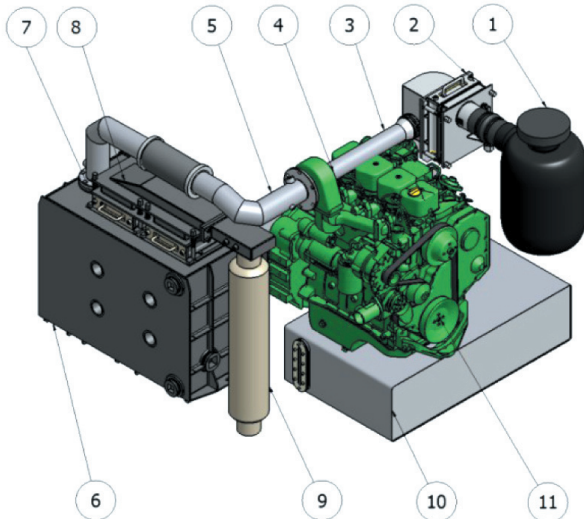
Sample design of engine unit intended to operate in atmosphere threatened by methane and/or flammable dust explosion hazard meeting Stage I/II requirements: 1 – air filter, 2 – flame arrester in inlet system, 3 – inlet hose, 4 – turbocharger, 5 – exhaust gases outlet hose, 6 – water exhaust gases washer, 7 – flame arrester in exhaust system, 8 – exhaust manifold, 9 – spark arrester, 10 – fuel tank, 11 – diesel engine [5]
